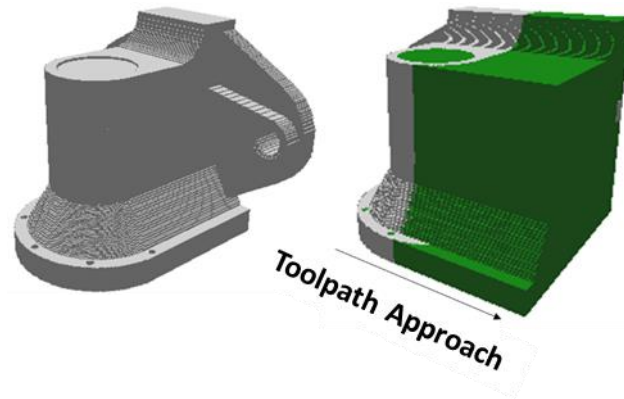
Starting geometry (left) and toolpath filled shape with tool approach in the x-positive direction (right)
